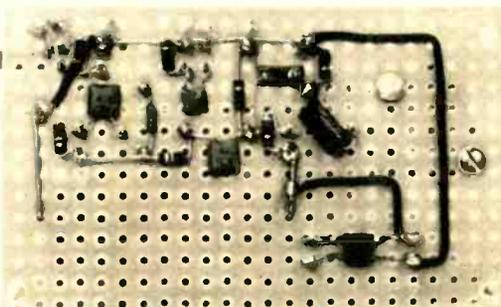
Bottom of circuit board. Square component at lower right is full-wave bridge rectifier. If it's easier, mount some more parts on top side.
